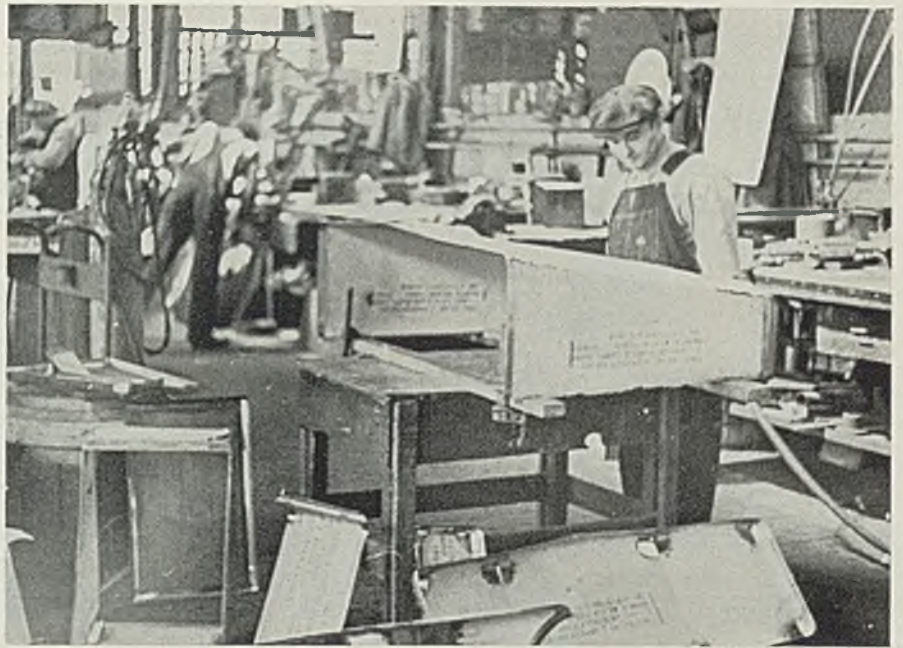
Blocking this work to exact position is done to be sure that edges to be butted together for welding are square, with no space between and even. This is done by hand grinding and fitting the edges
